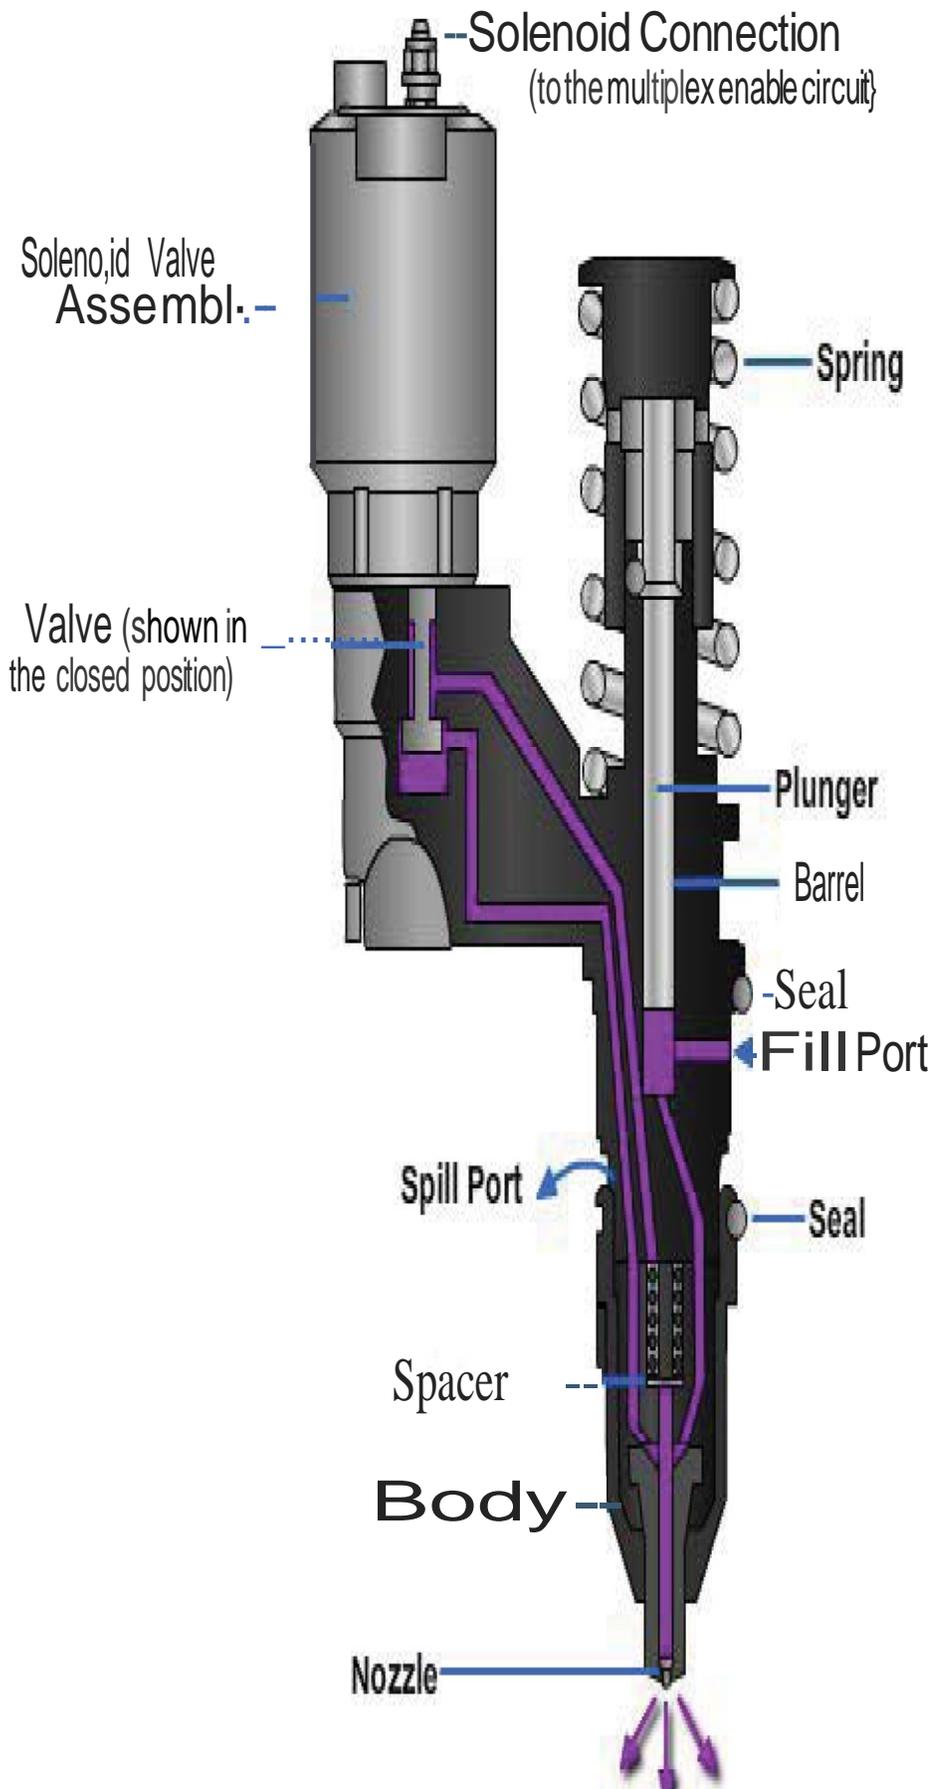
Cutaway view of a fuel flow unit injector.
